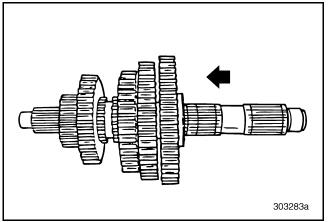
Moving Sliding Clutch and Reverse Speed Gear Forward (T313L/T318L Shown)
